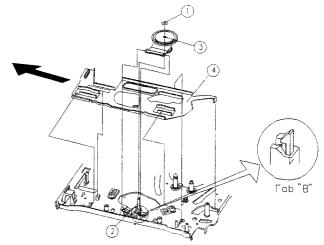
REEL GEAR TOTAL ASS'Y & CONNECT PLATE REMOVAL
